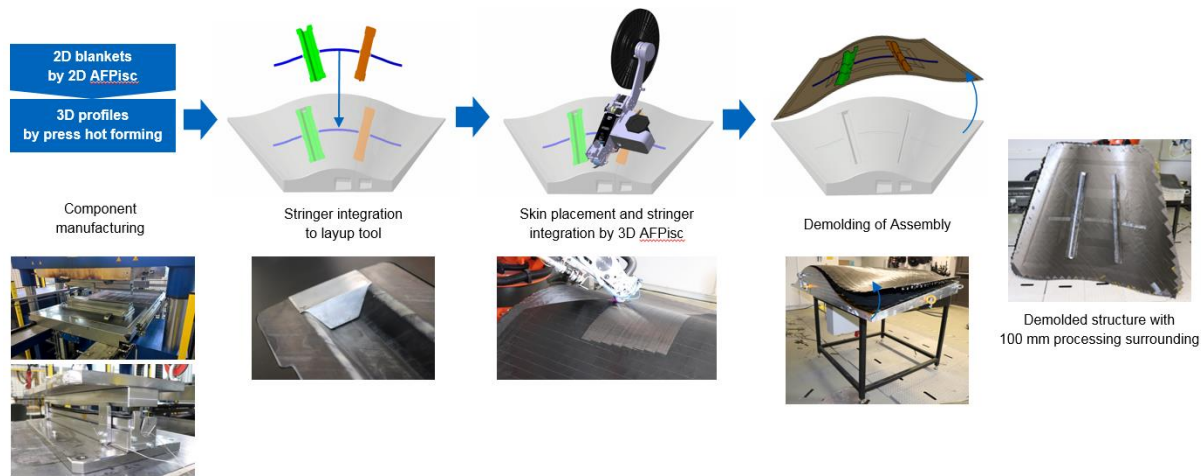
Demonstrator part of project INSCAPE and manufacturing route consisting of a blanket placement, stringer forming and skin placement with direct joining.
